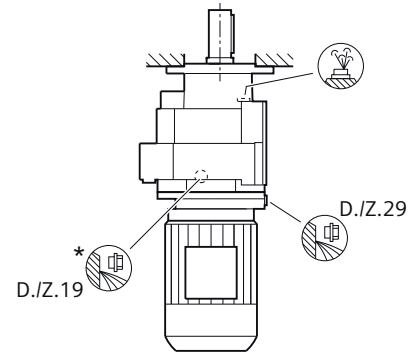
Mounting positions for helical gearbox DB/ZB foot / flange-mounted design, sizes 39 - 89
